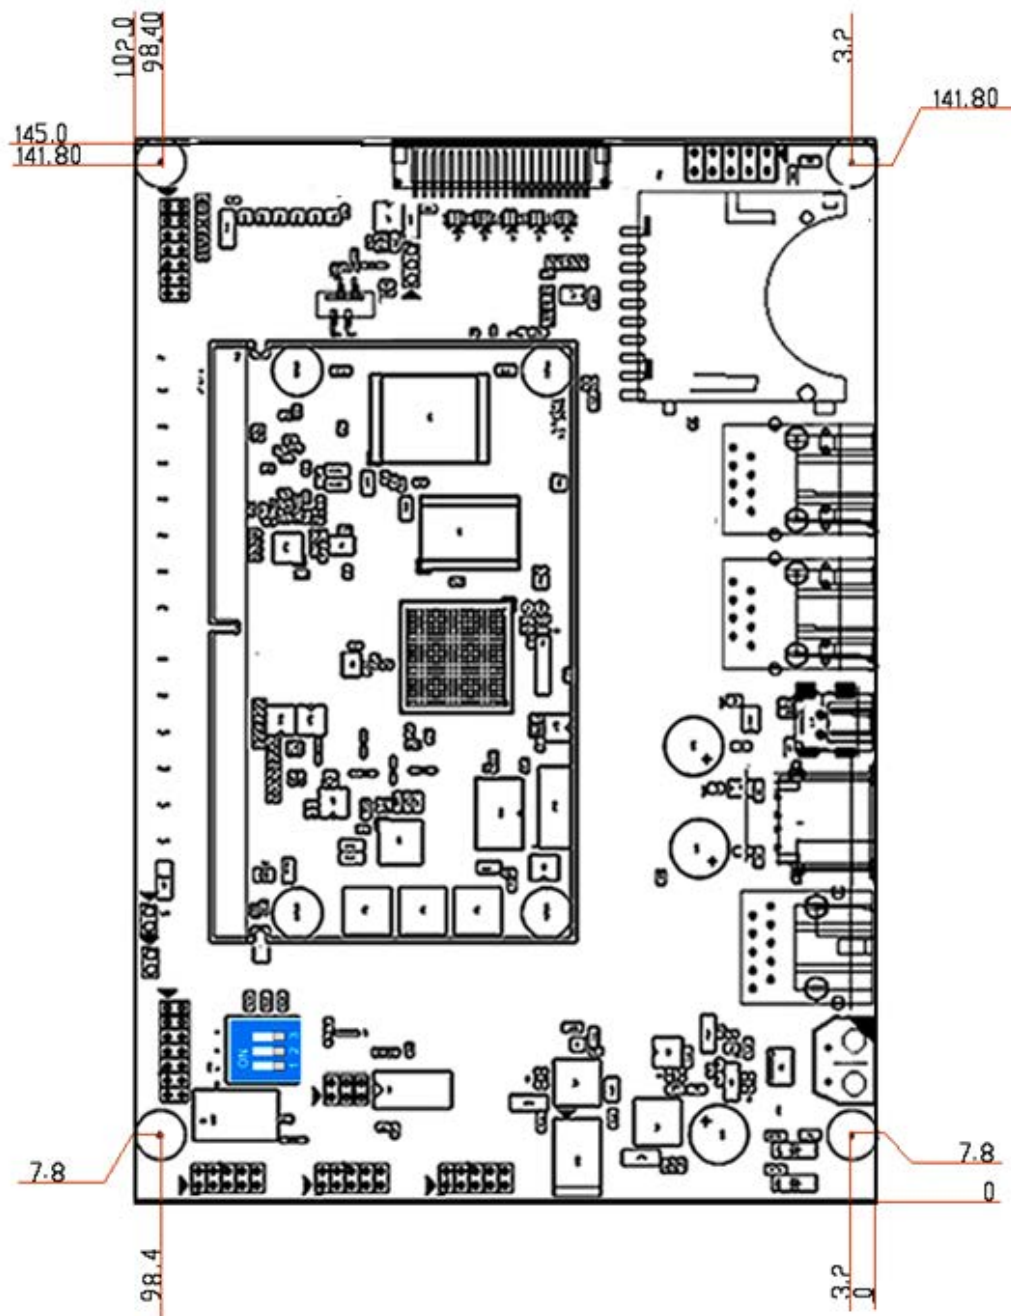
SBC-SMART-BEE Mounting Holes Mechanical Drawing Information
